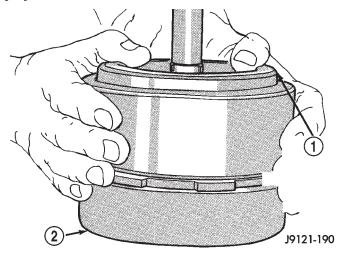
Assembling Front And Rear Clutch Units 1 – TURN FRONT CLUTCH BACK & FORTH UNTIL SEATED 2 – REAR CLUTCH ASSEMBLY
